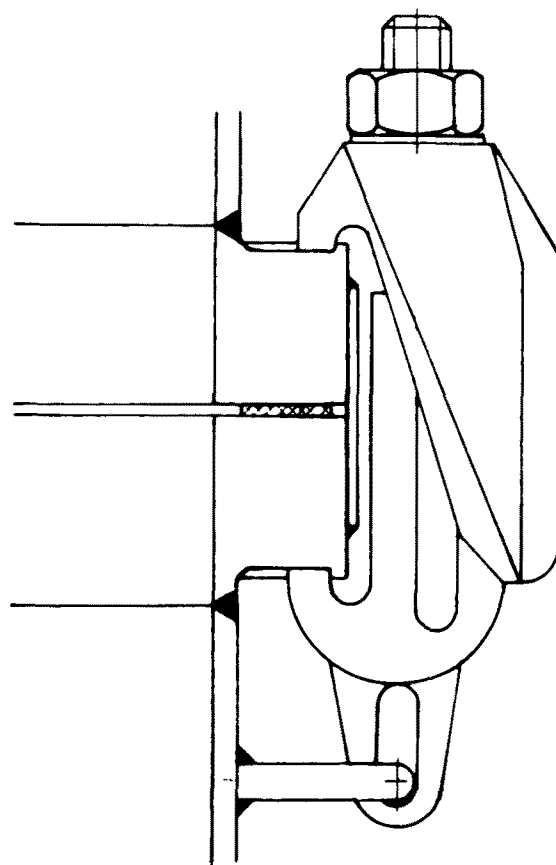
Seal-welded flange joint with clamp-screws using a sheet strap.
